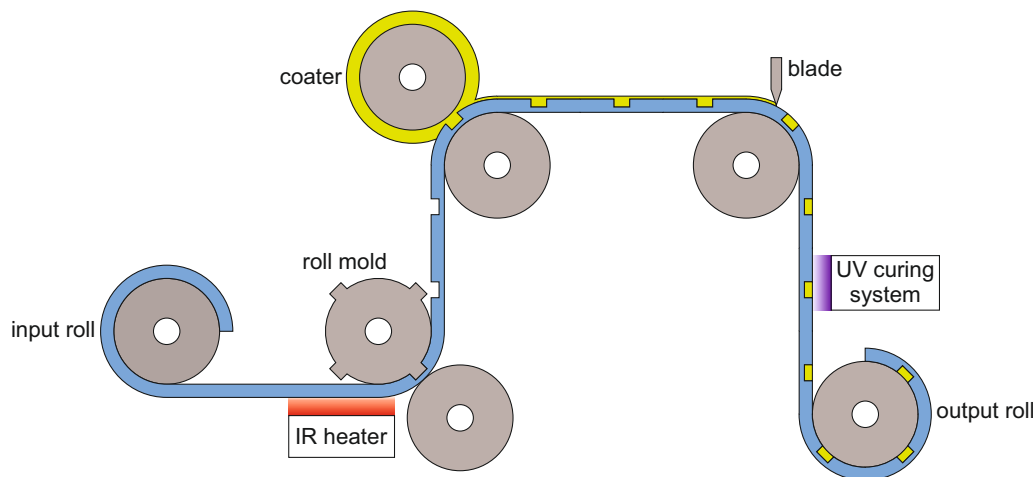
Schematic of a roll-to-roll waveguide fabrication setup based on hot embossing, doctor blading and UV curing.
